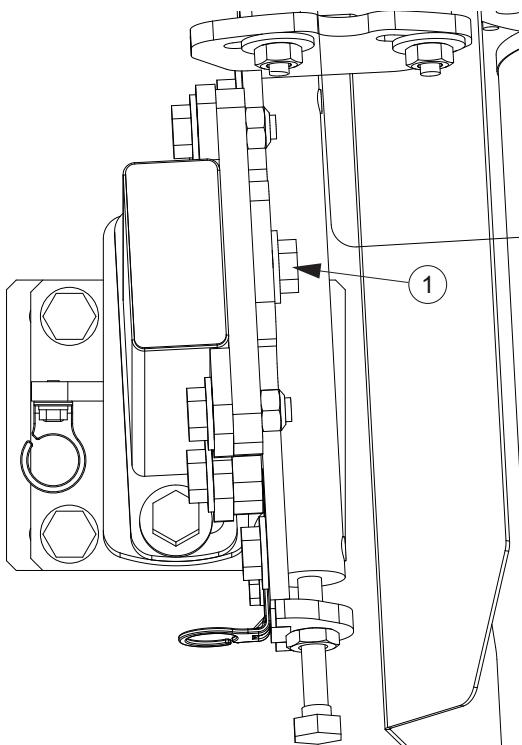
Adjust Neck Skin Cutting Module - cutting angle
